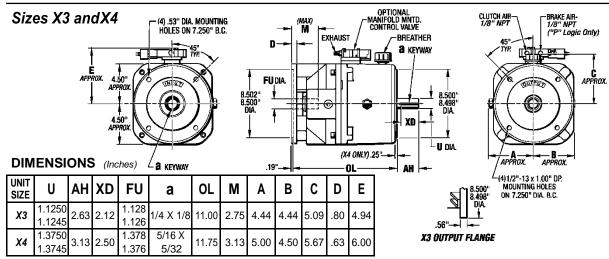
X3 and X4 Dimensions (Standard Unit)
